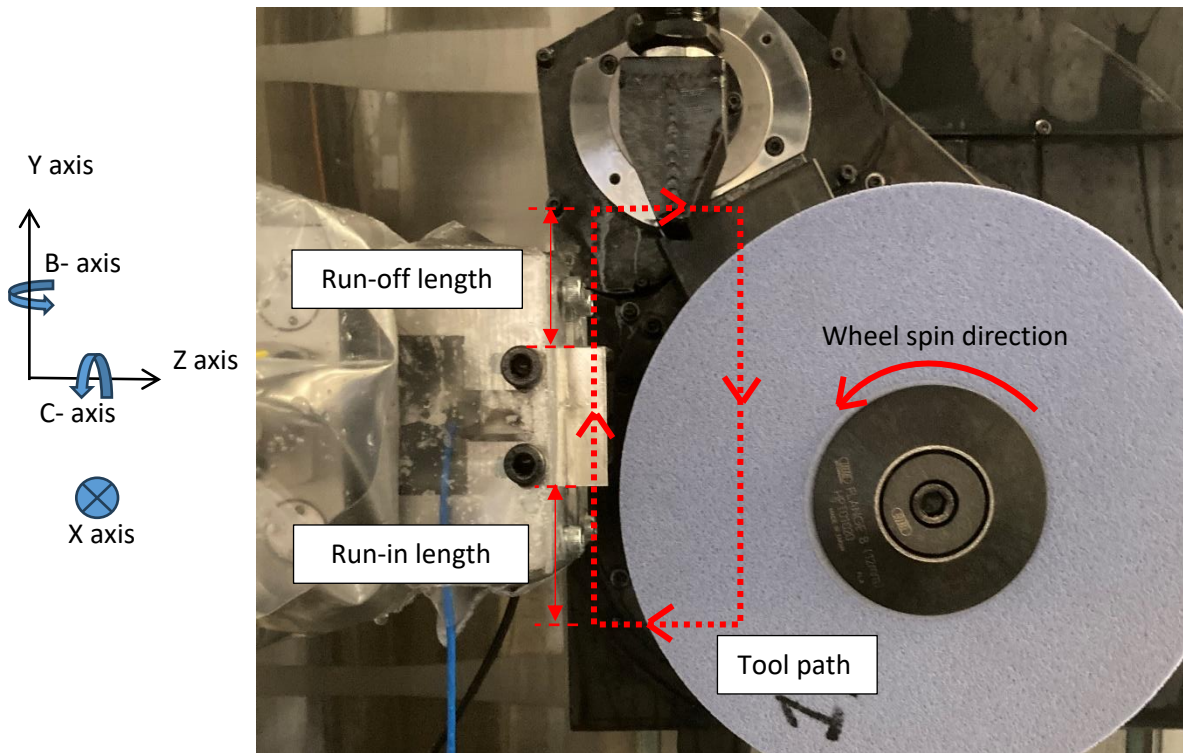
Illustration of the tool path used within a grinding cycle. Sketch shows the coordinate system used to represent the motion while grinding with respect to the machine. Note the X-axis is represented as directed into the paper.
